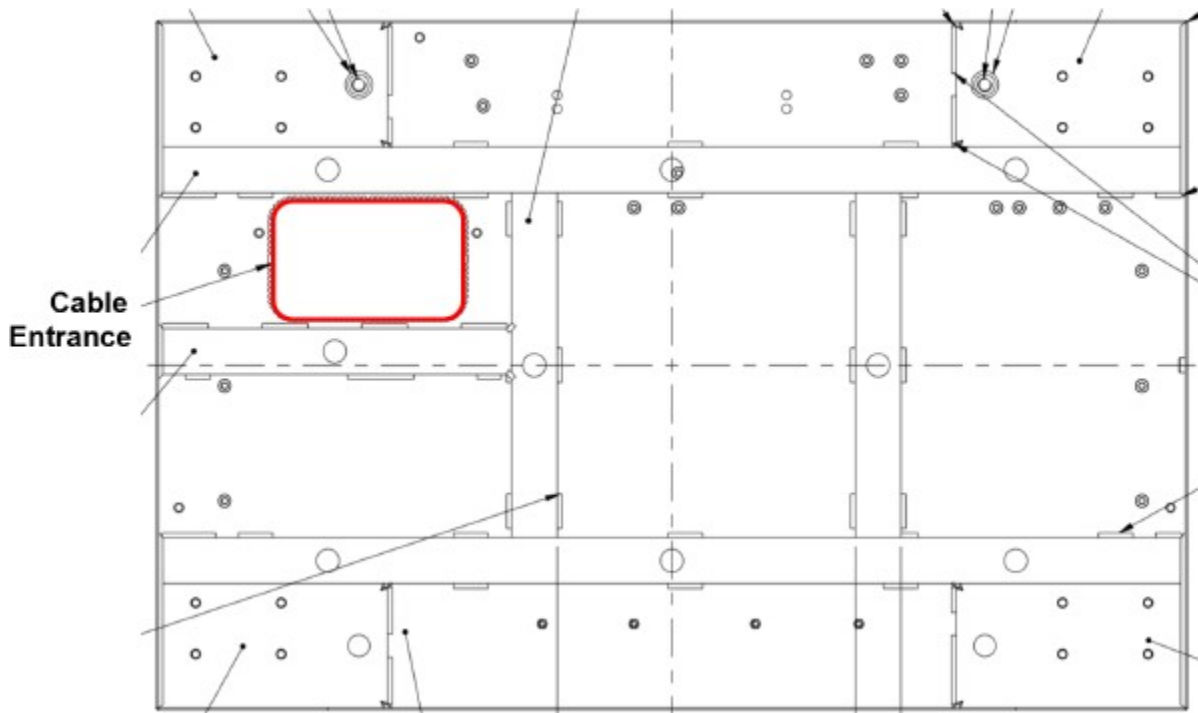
Cable Entrance Behind the Wall Stand Housing
